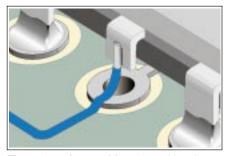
Acceptable* Wire soldered to clipped lead on component side. +
